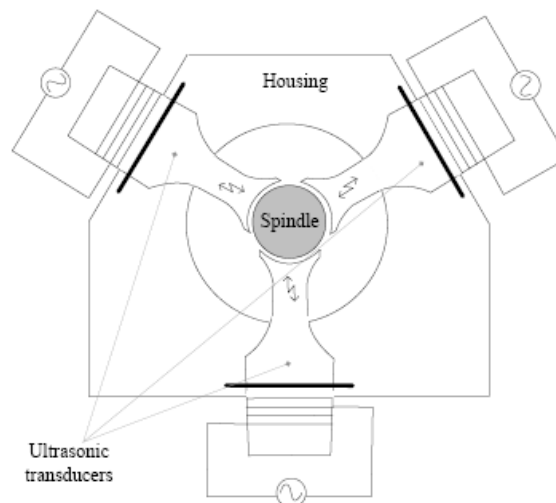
Squeeze film bearing system for supporting a rotation spindle [32].
